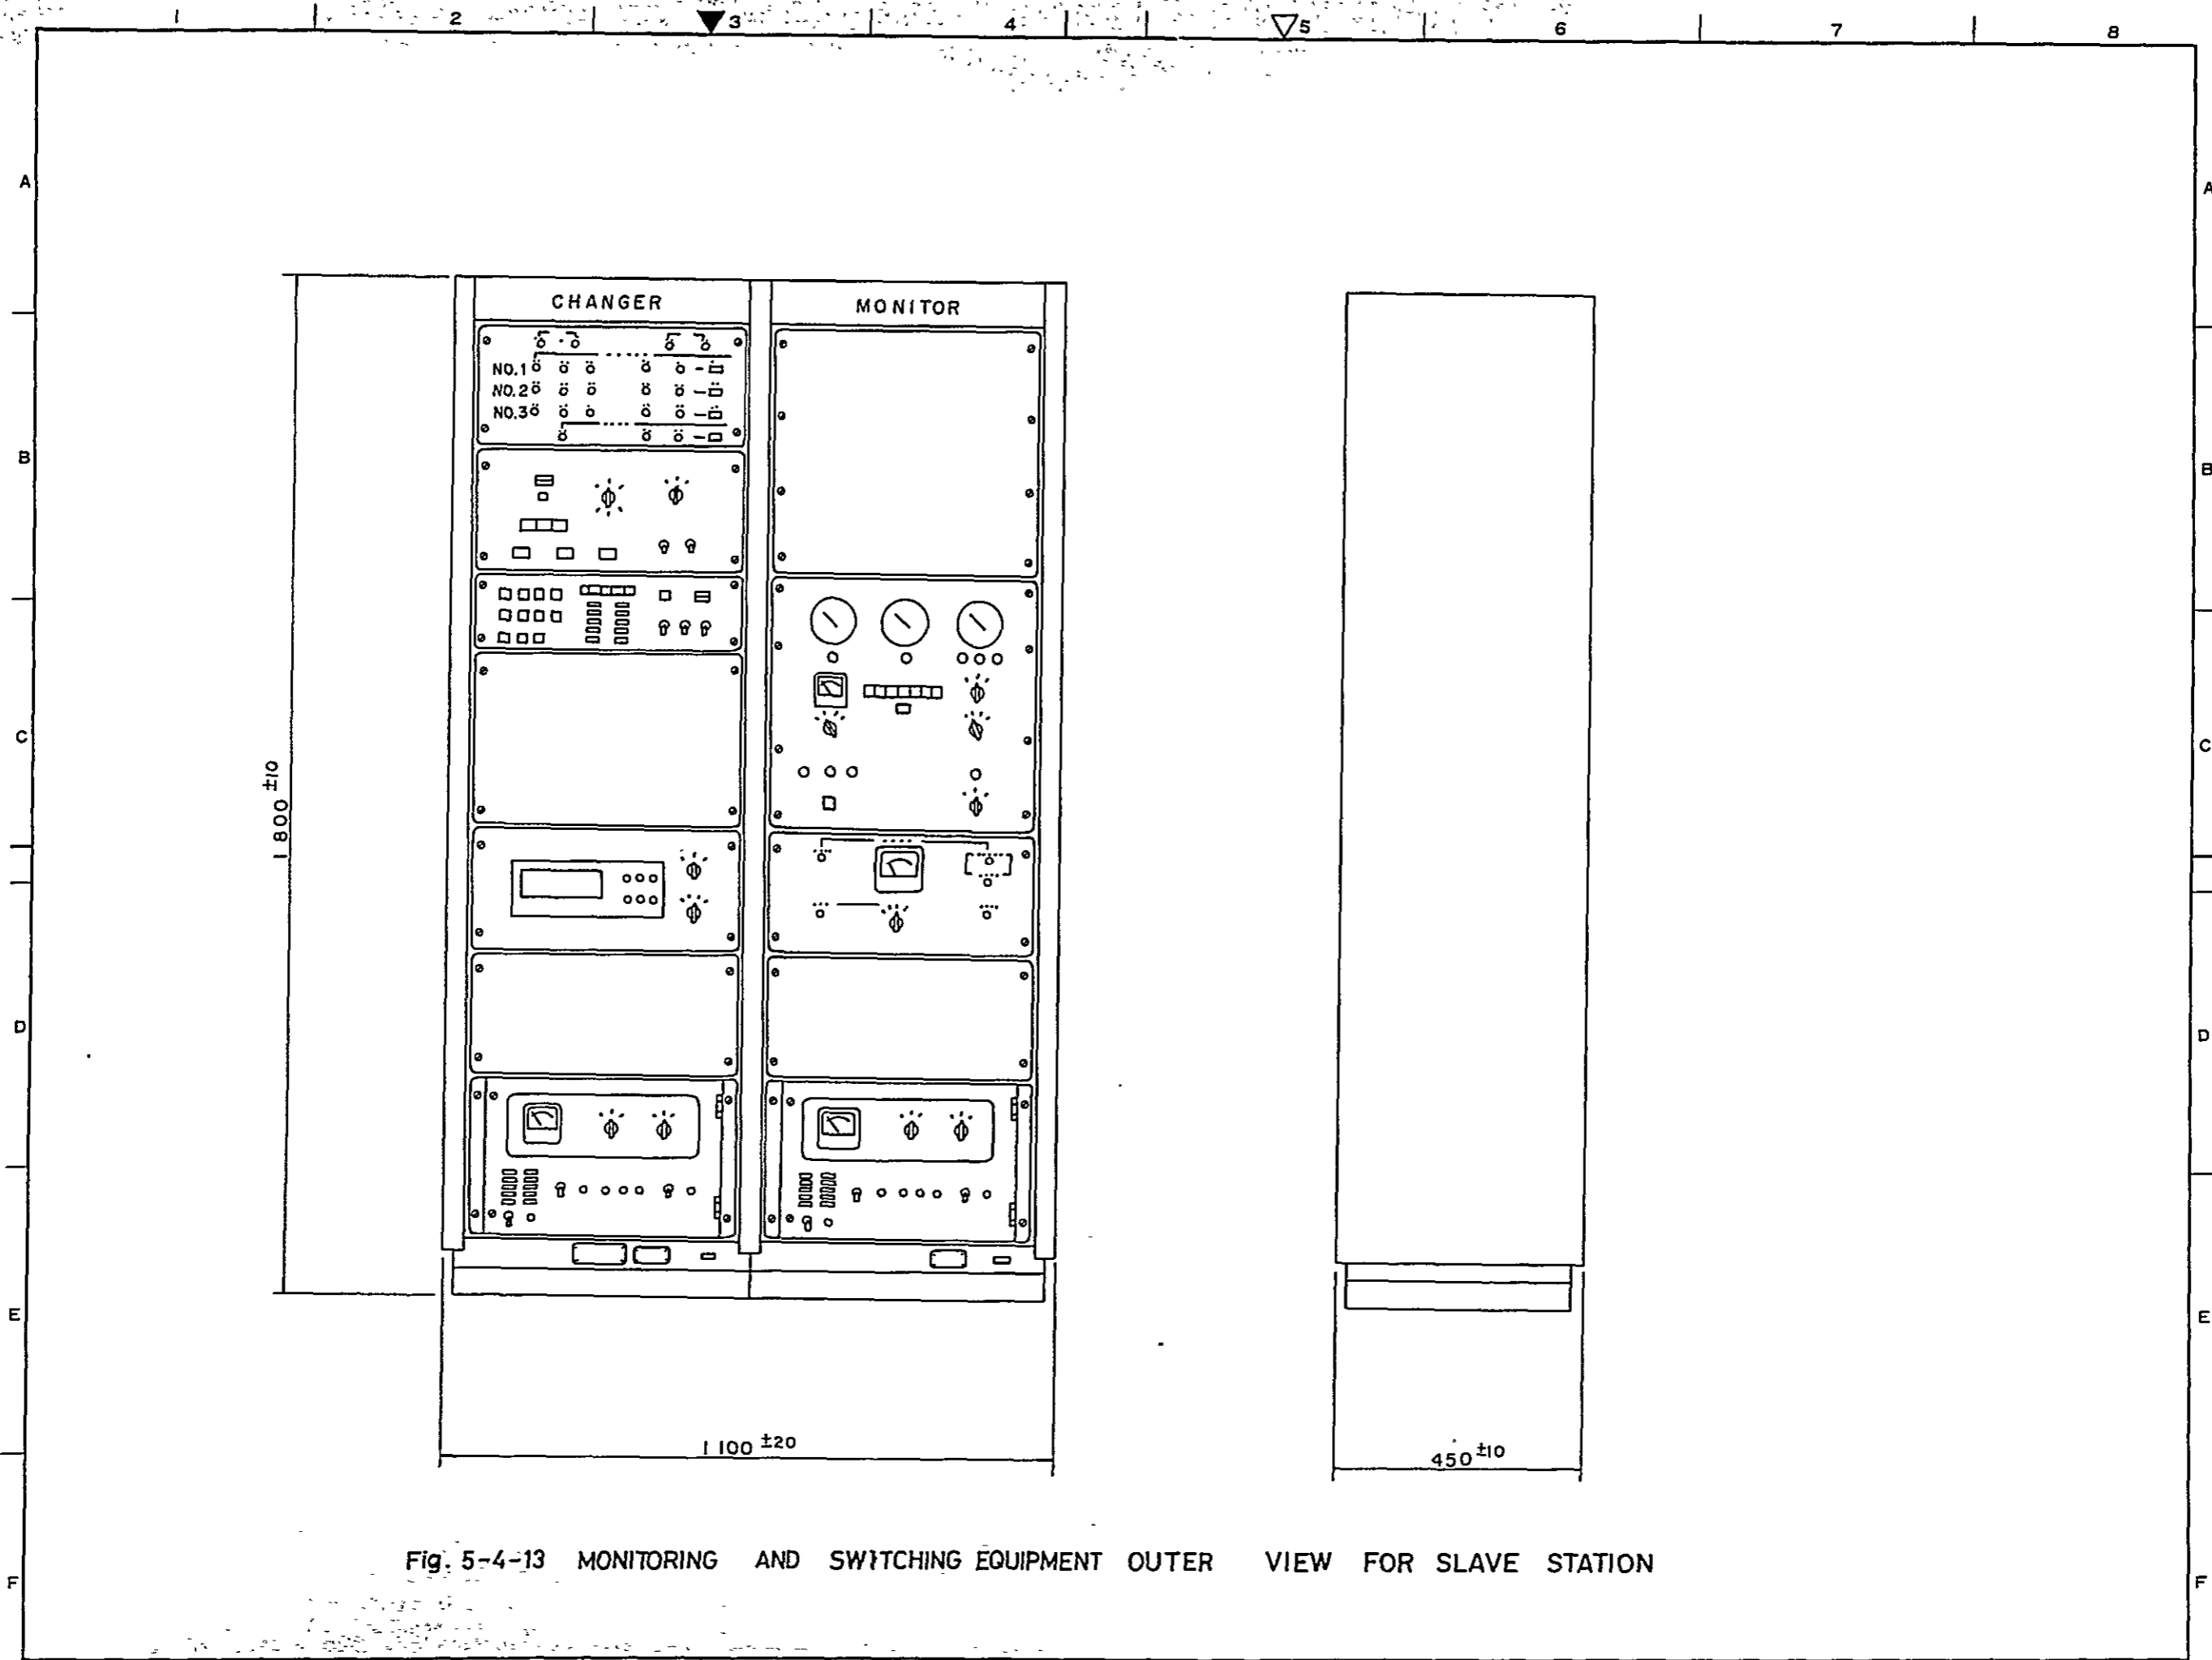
MONITORING AND SWITCHING EQUIPMENT OUTER VIEW FOR SLAVE STATION
